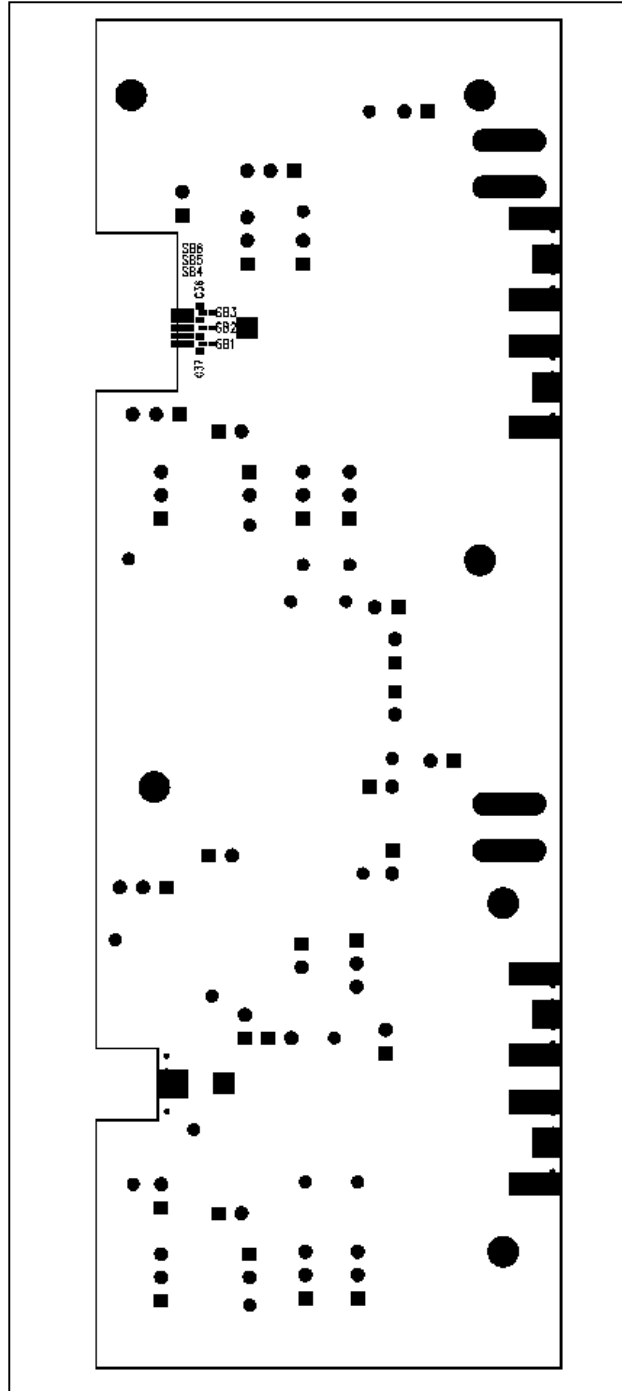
MAX3735A EV Kit PC Component Placement Guide—Solder Side
